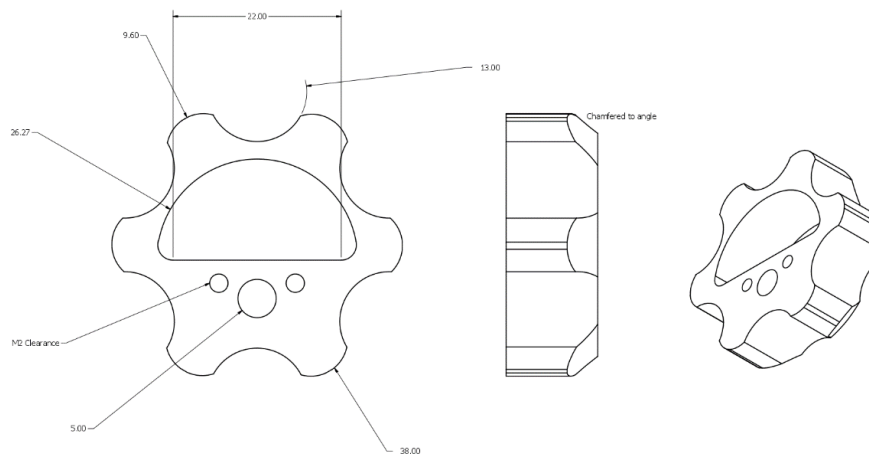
Drawing of the Tufnol centring guide. The M2 clearance is for screwing to the bottom terminal. The large gaps are to enable maximum helium flow. [mm]
